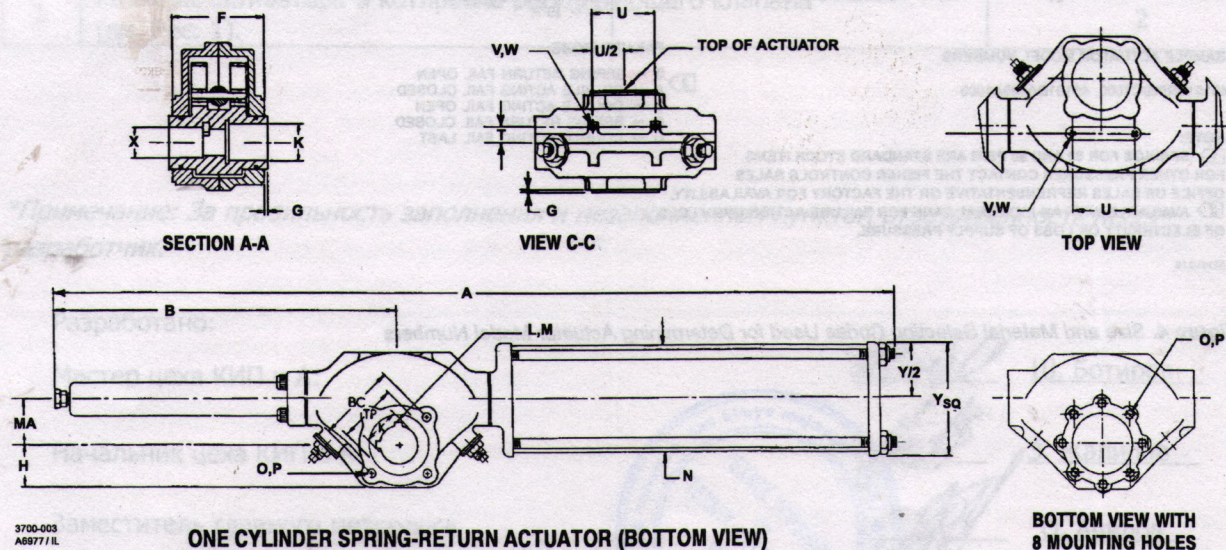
Dimensions, Inches, for Spring-Return Actuators (Continued)
